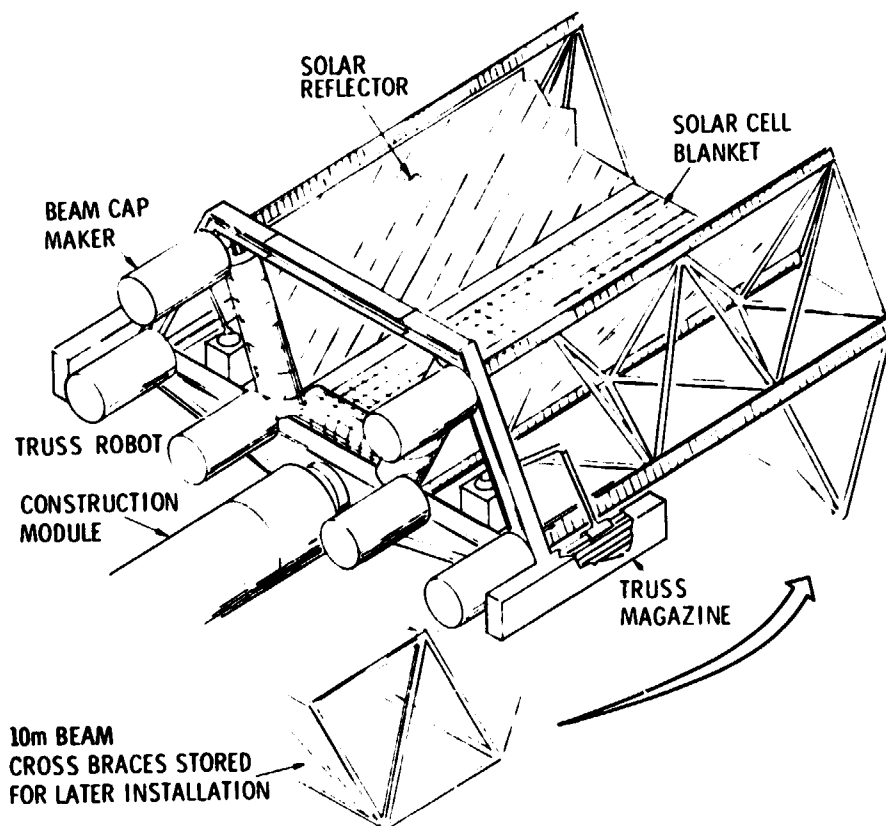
Test Article-2 Fabrication and Assembly Fixture
